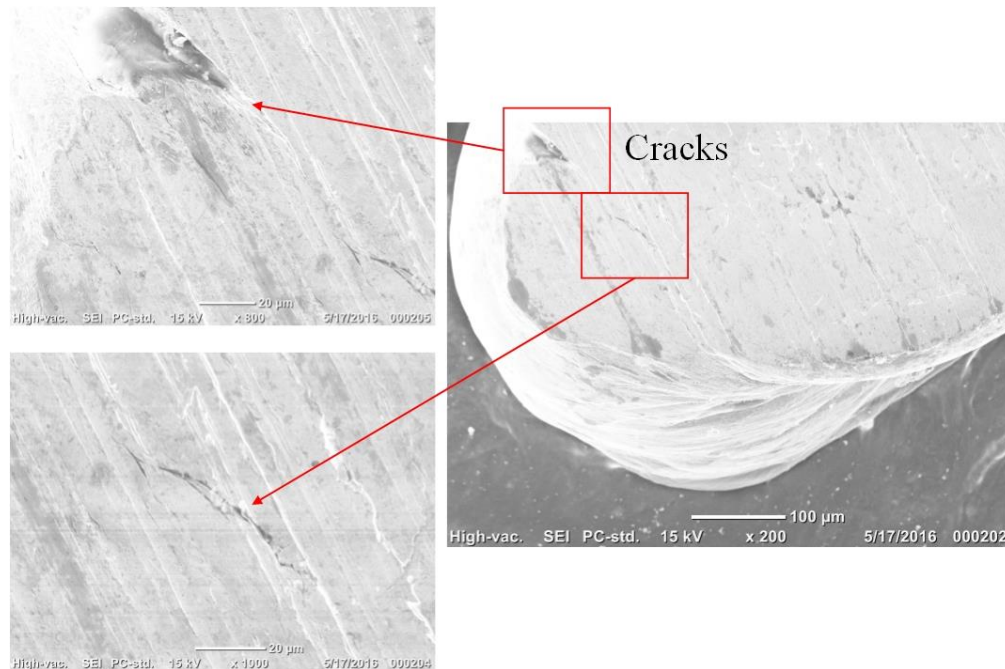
SEM image of the cracks on the surface of small workpieces with large grains
